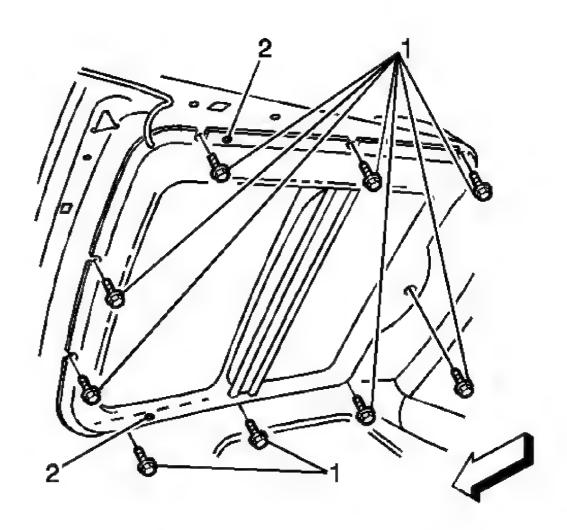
Removing & Installing Sunroof Module-To-Roof Bolts Courtesy of GENERAL MOTORS CORP.
